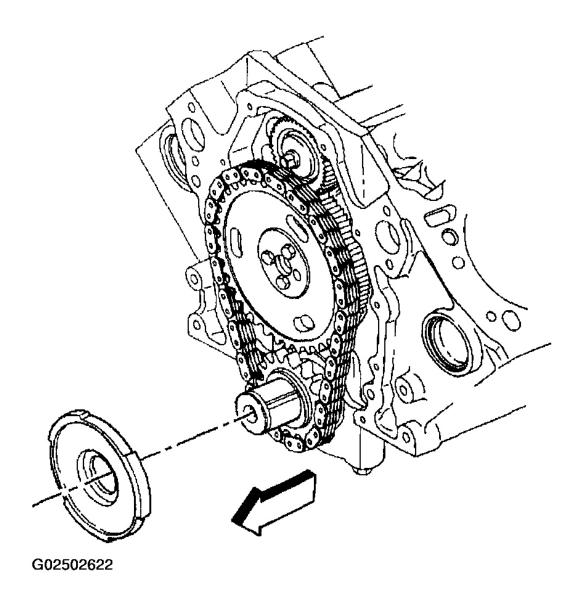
Removing Crankshaft Position Sensor Reluctor Ring Courtesy of GENERAL MOTORS CORP.
